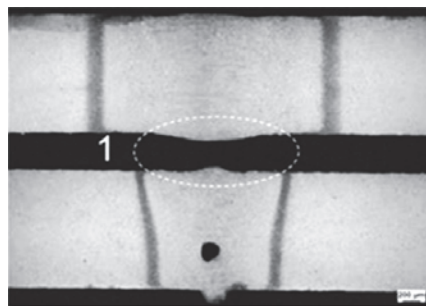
False friend — cross section shows no weld between the upper and lower sheets.
